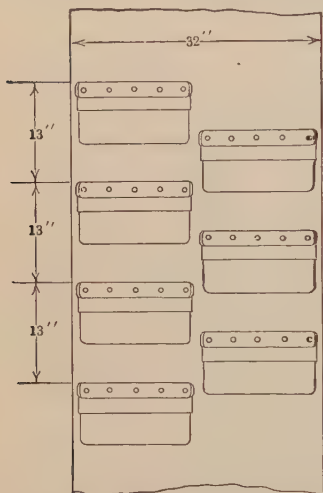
15-inch Buckets Spaced 13 Inches in Double Row on 32-inch Belt.
